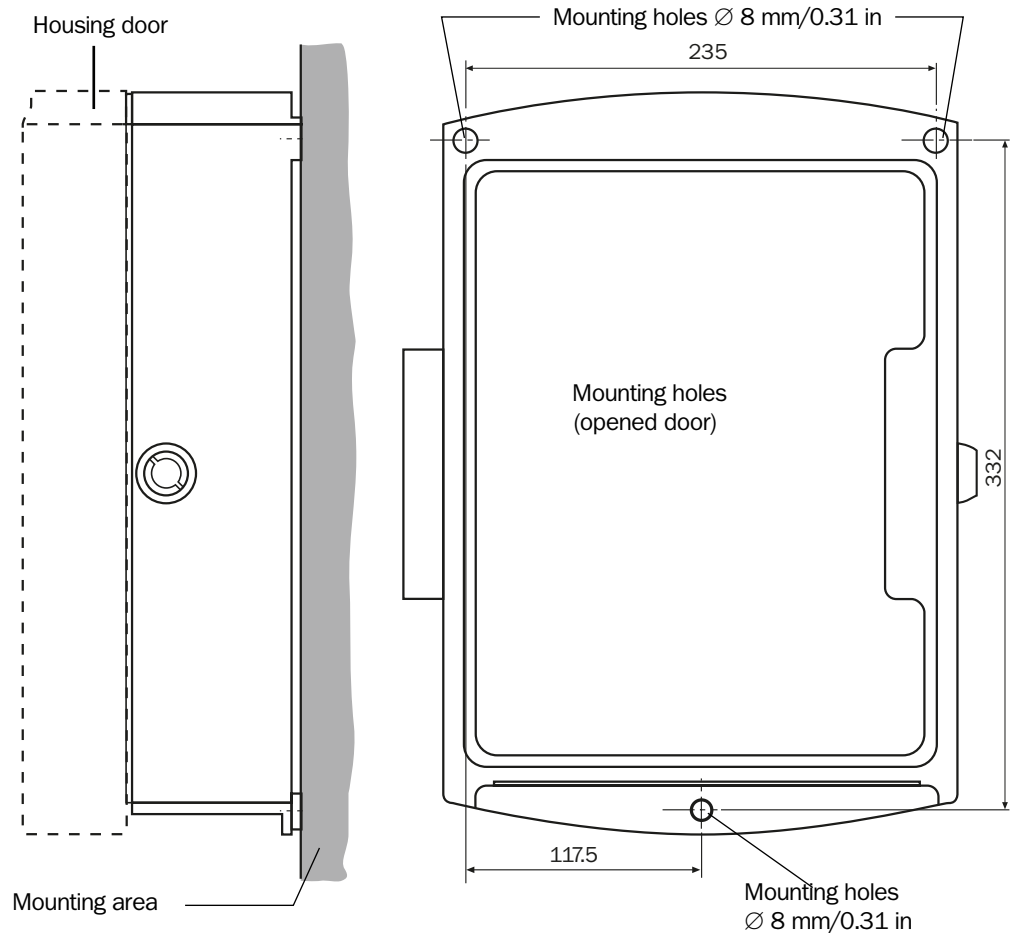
Hole layout (bore hole plan) for mounting the evaluation unit (cast aluminium)
